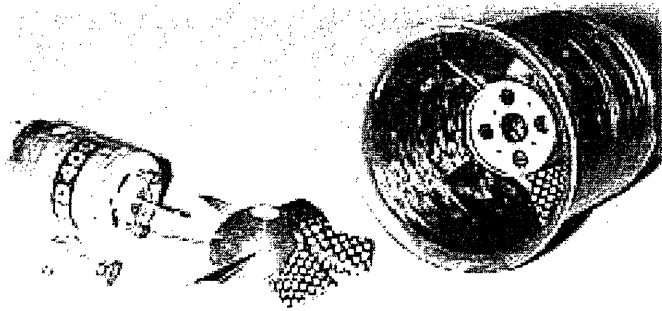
Ducted fan assembly consisting of a high-speed motor coupled to spinning blades within the carbon fiber cylinder, resulting in the considerable acceleration of air particles.
